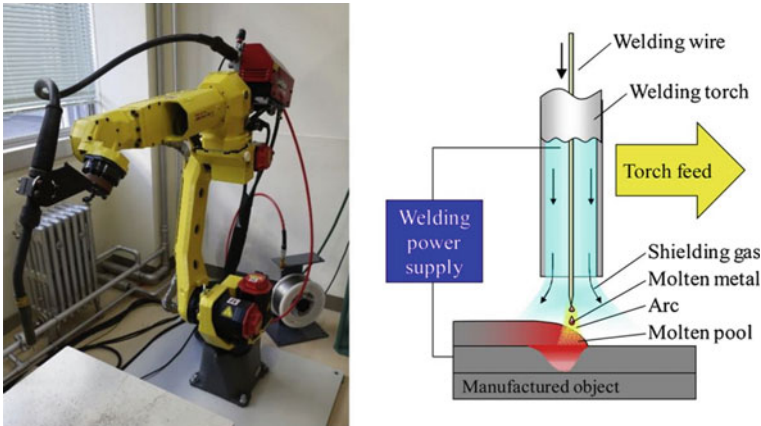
Setup and schematic of MIG welding material deposition process [32]
